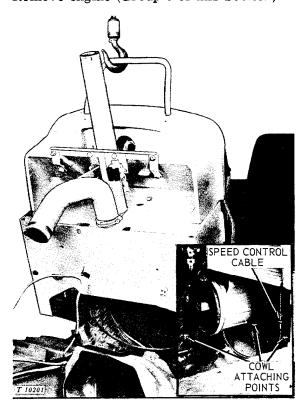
Removing Cowl Support (Tractors without Loaders)
